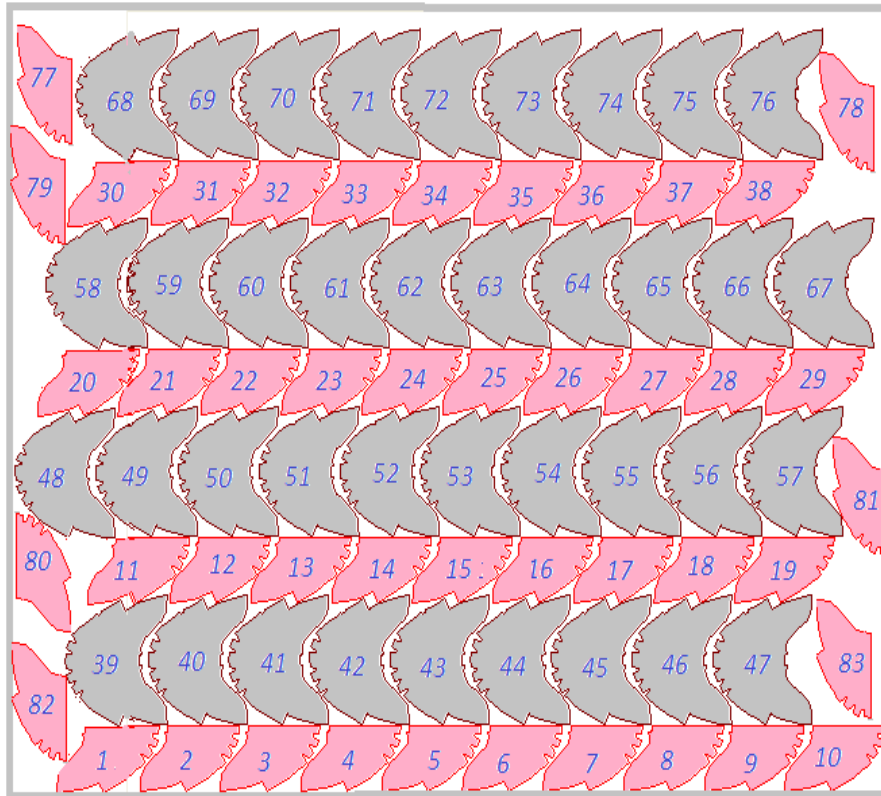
Sequence of cutting details according to the designed cutting pattern
